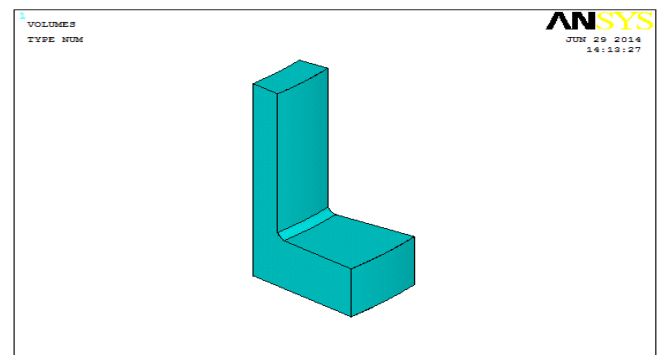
1/16th Part of metallic flange of 44.mm thickness
